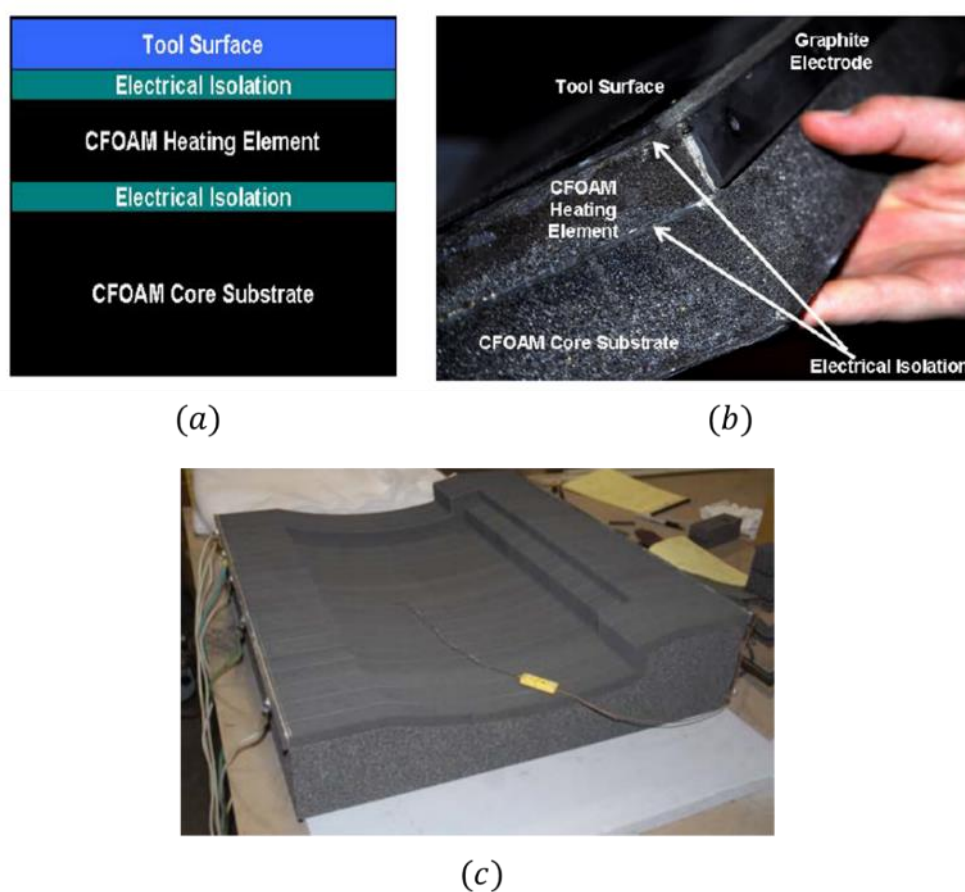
CFOAM heated tool: (a) schematic of the mold structure; (b) mold of flat surface; (c) mold of complex geometry [18].
